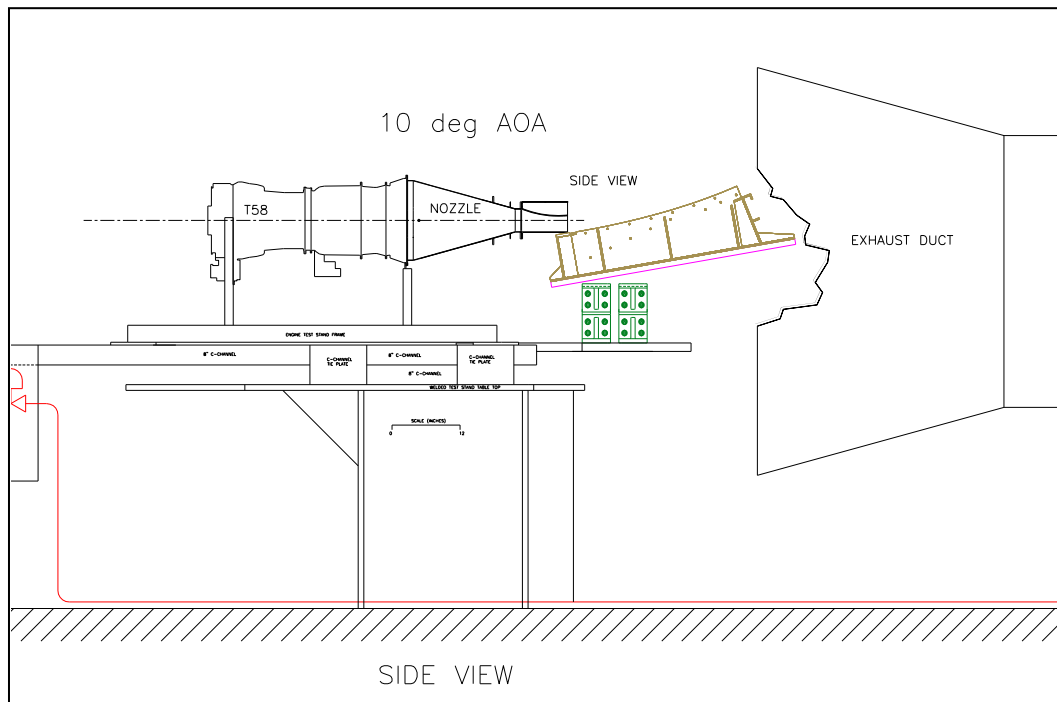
Test panel and fixture mounted behind T-58 engine
